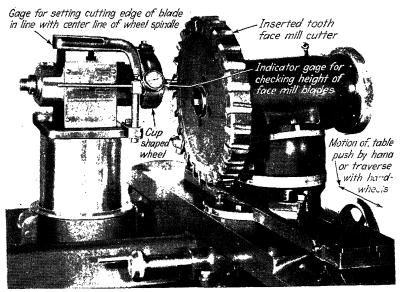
Grinding an inserted tooth cutter. (Cincinnati.)
